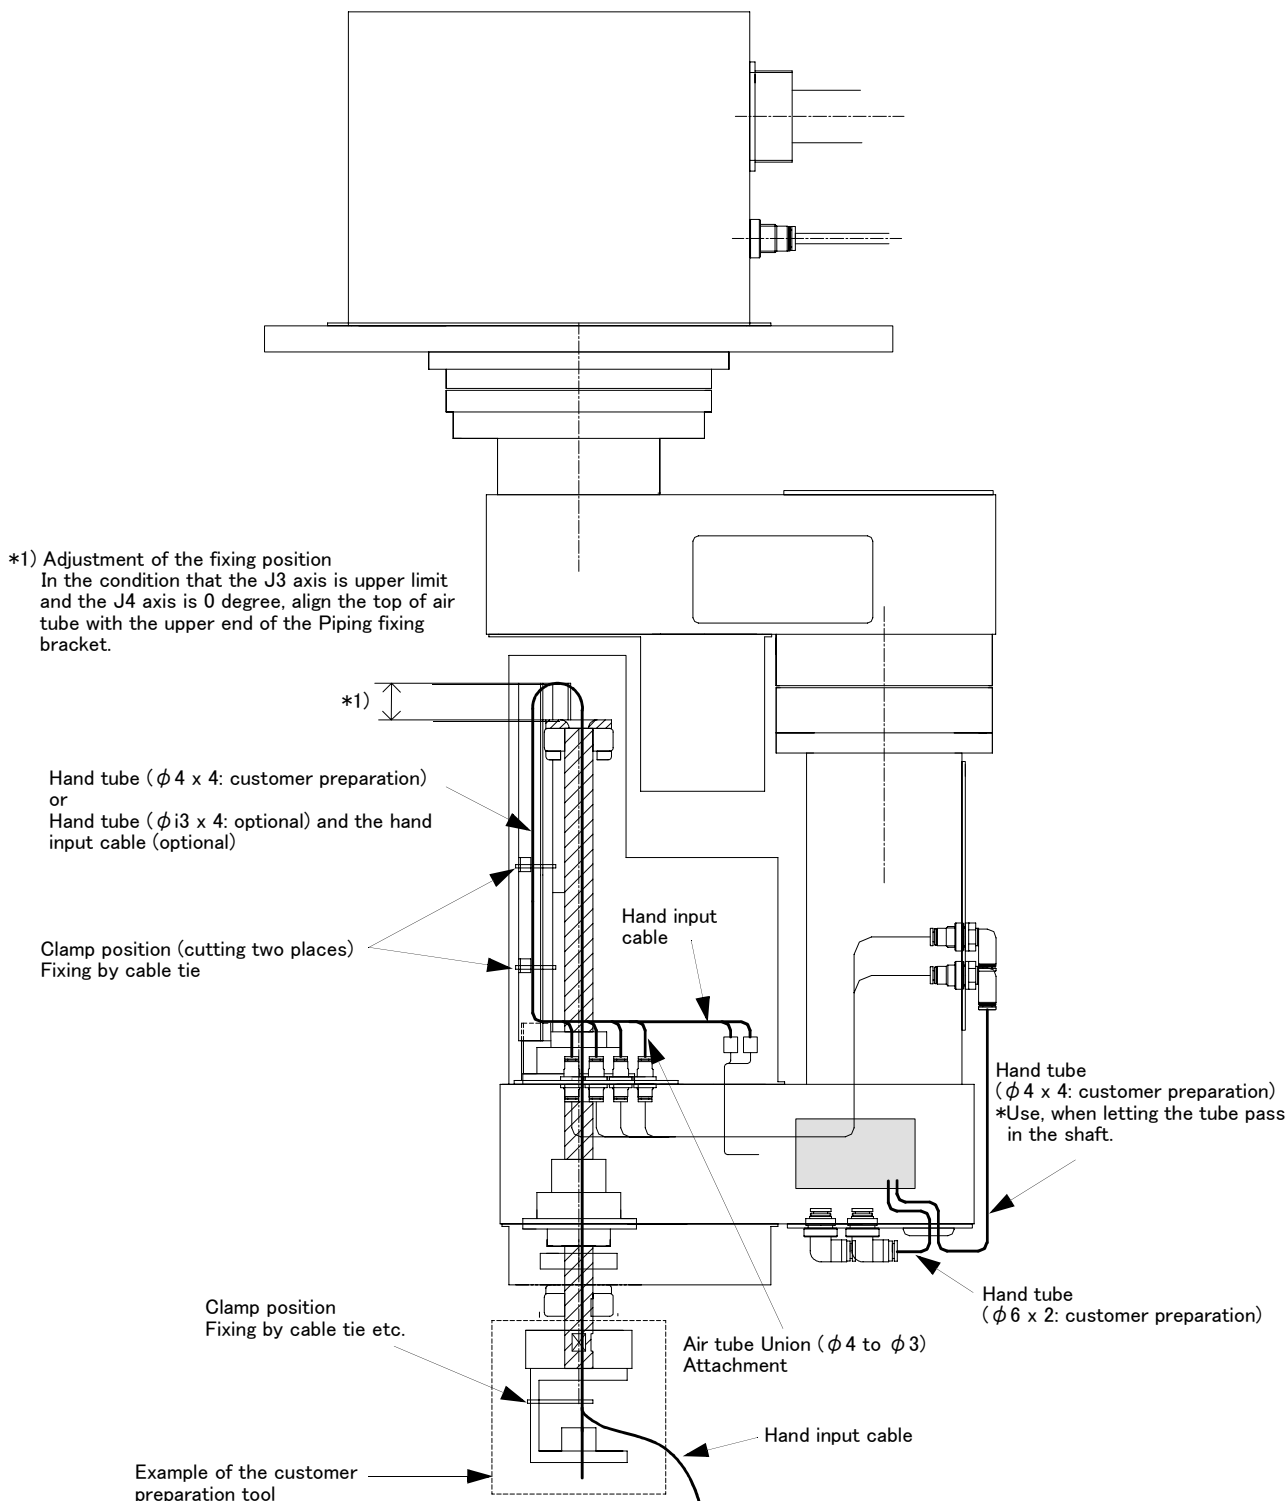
Example of wiring and piping <1> (Floor installation type)
